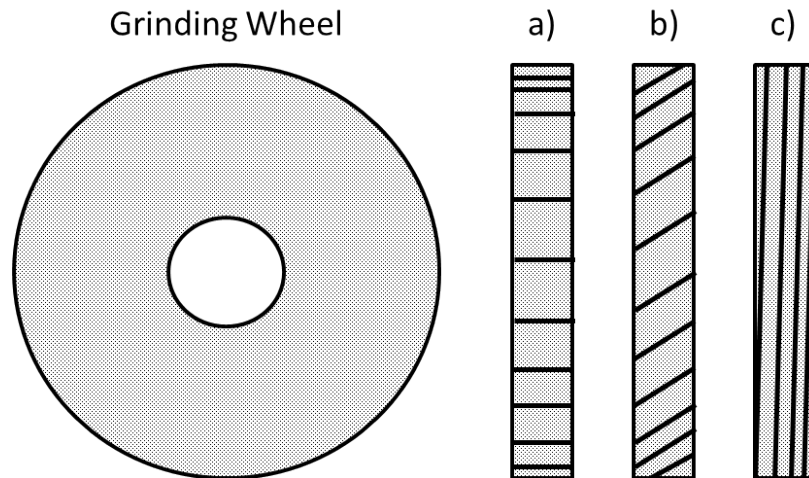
Three common types of grooved grinding wheel, a) axial, b) helical, and c) circumferential
